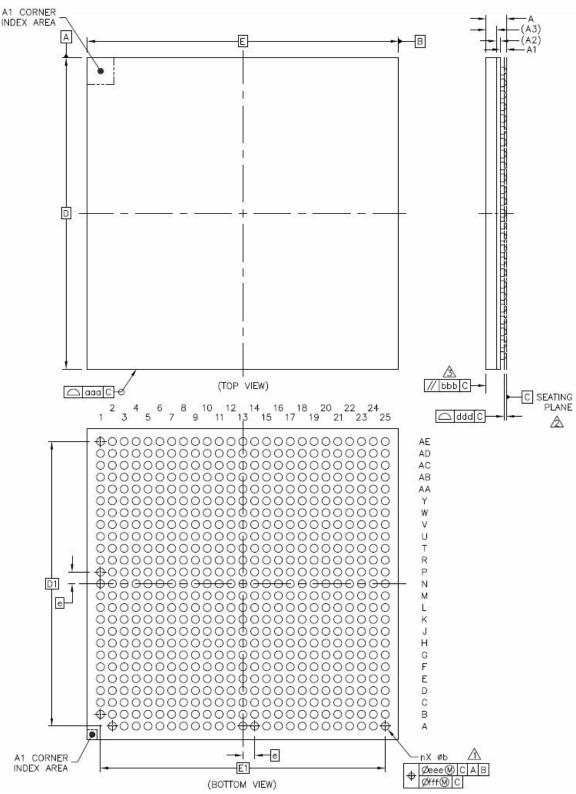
21 x 21 mm BGA, Case 2240 Package Top, Bottom, and Side Views
